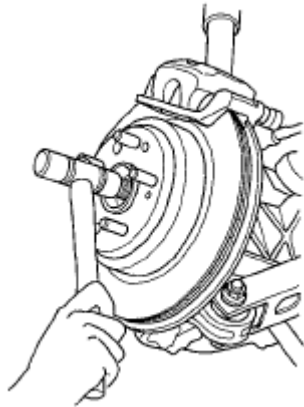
Removing Rear Driveshaft Outboard Joint From The Trailing Arm And Rear Hub
